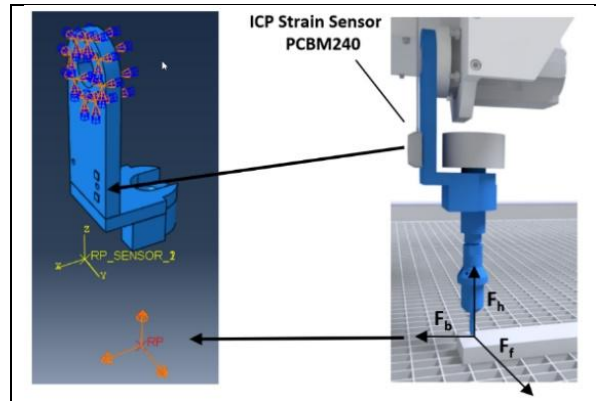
FEM model of the supporting structure corresponding to the actual five-axis cutting head support assembly
